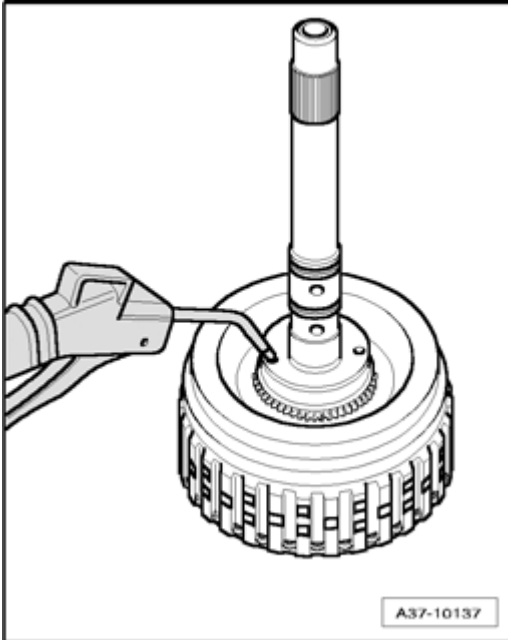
Pressing Piston "A" Out Of Cylinder "A" With Compressed Air
